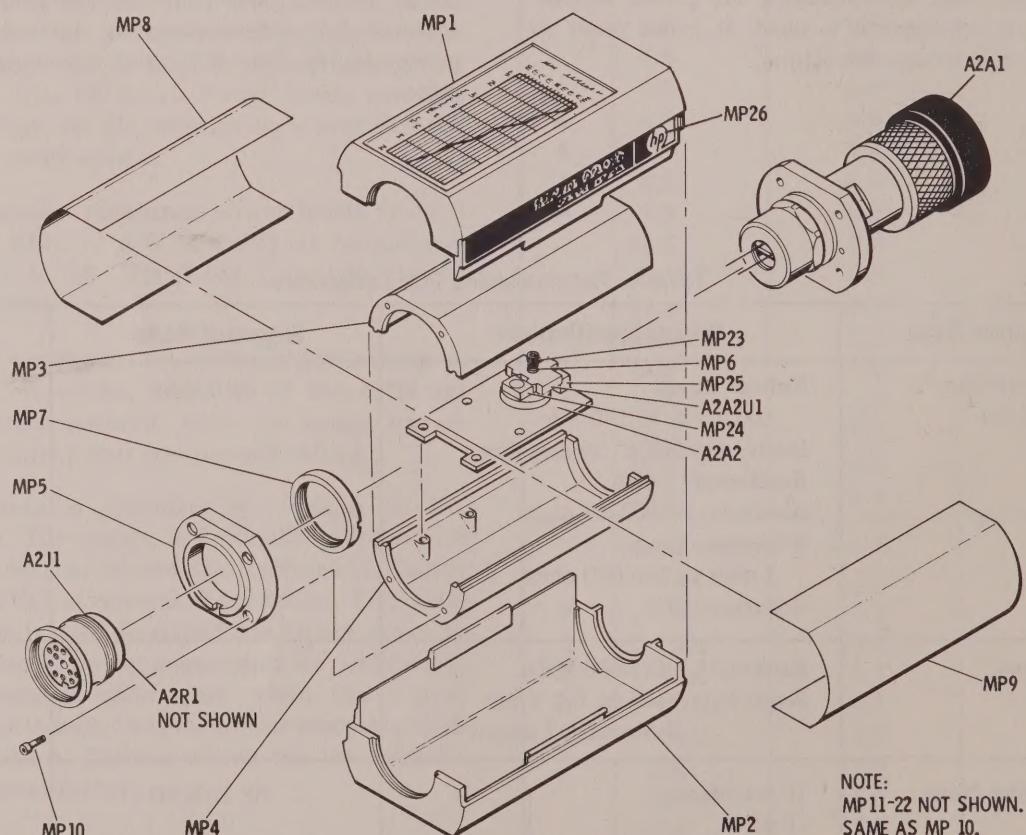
Illustrated Parts Breakdown of the A2 Sensor Assembly
